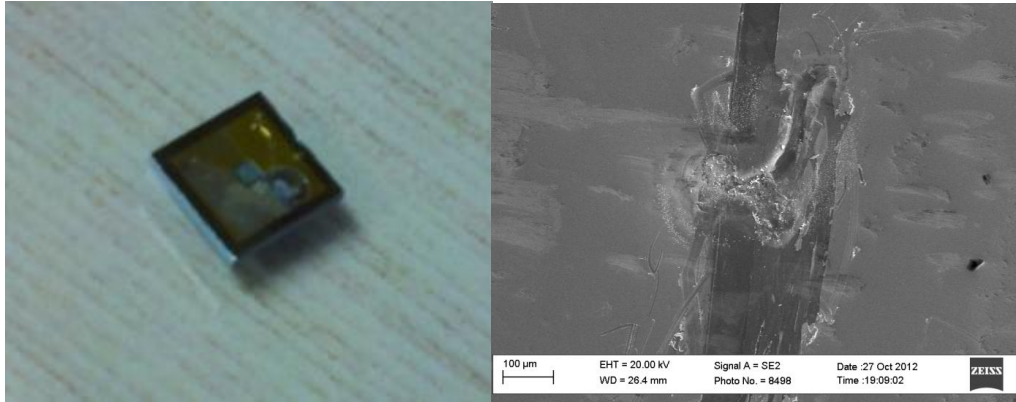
Left: image of the arc-welded sample after testing. Right SEM image of the two contact pads and short formed due to the weld.
